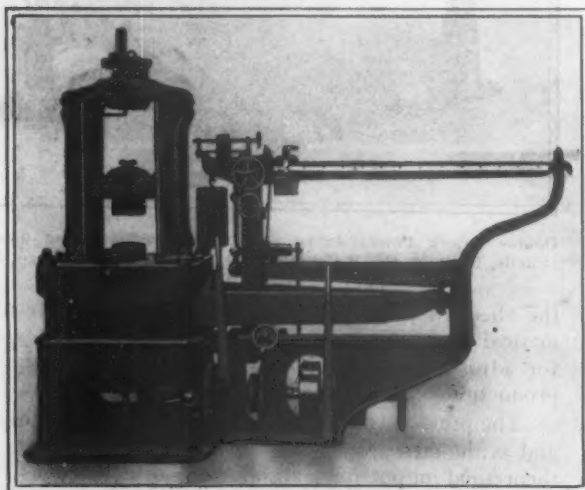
Ball Testing Machine, Used by the Standard Roller Bearing Company, Philadelphia, Pa.
